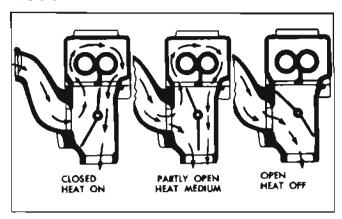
Exhaust Manifold Valve Operation-Sectional View
